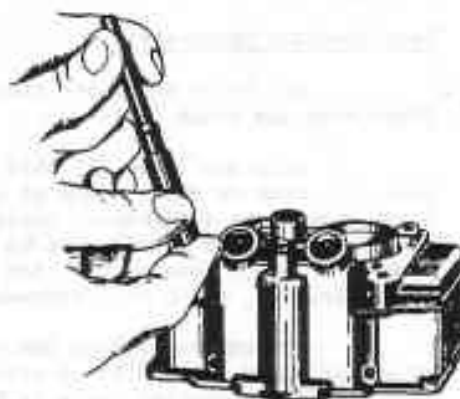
INSTALLING CHECK VALVE STRAINER (2).
